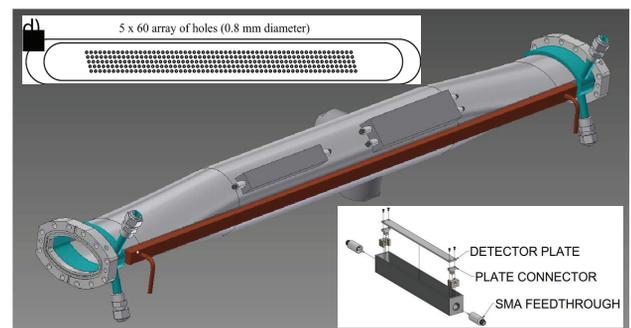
Schematic drawing of the new instrumented vacuum chamber design. The insets show the layout of the hole array for one of the three detectors, the enclosure for which is shown on the lower right.
